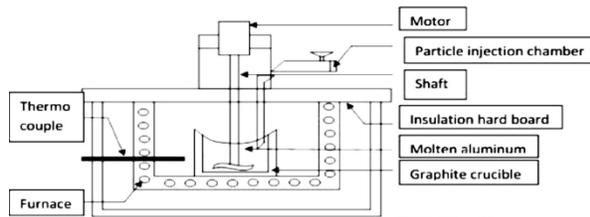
Schematic view of stirring mechanism for the fabrication of composites
